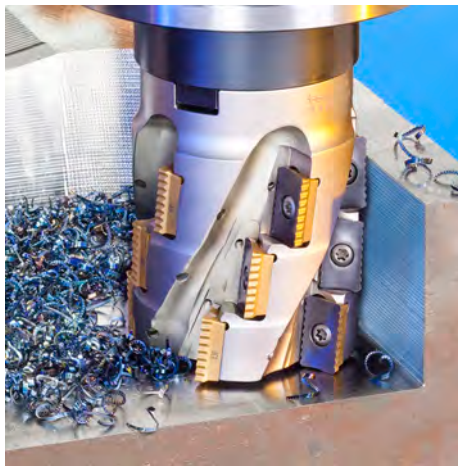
Chip-splitting geometry of Millshred indexable milling cutters provides high stable milling and better chip handling
